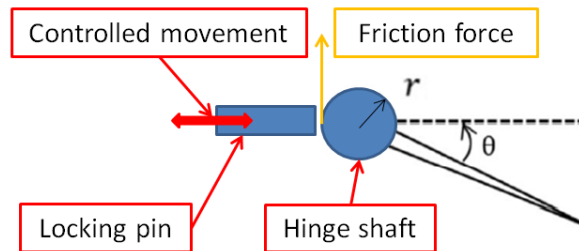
Sketch of the friction-based locking mechanism. The pin is pressed against the hinge shaft to create friction and lock the rotation of the wingtip.
